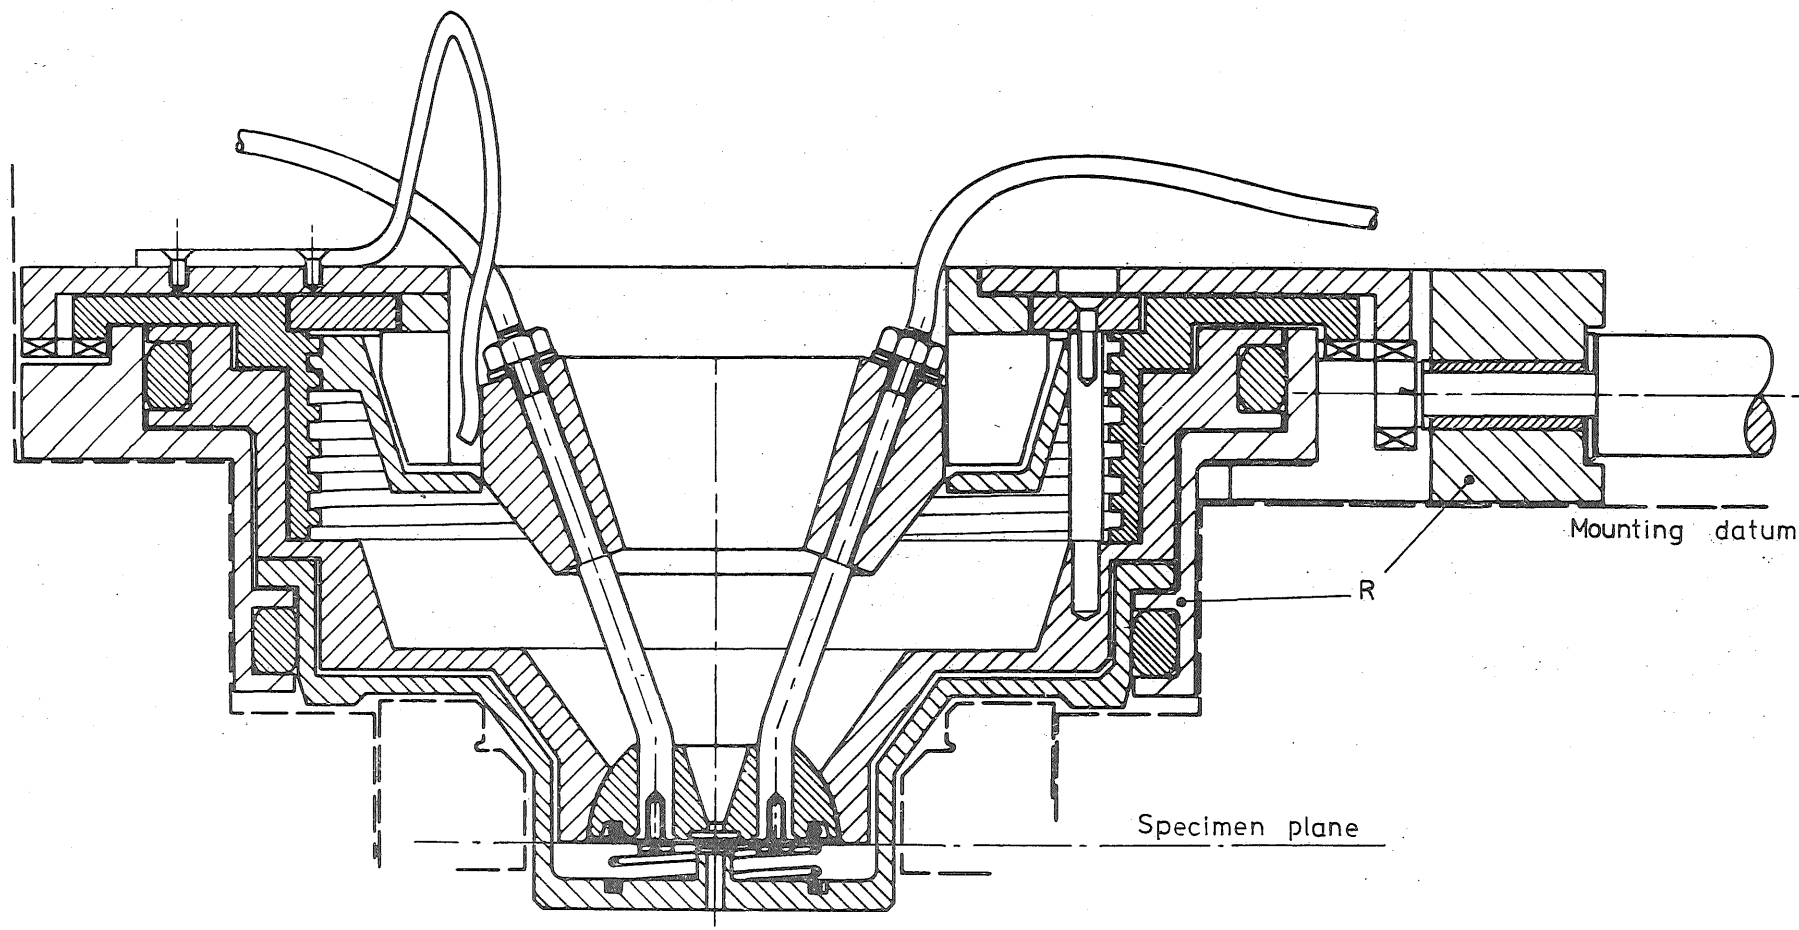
Initial concept of tilting gas reaction specimen chamber. The outer ring (R) which contains an 'O' ring seal and tilt drive shafts is designed to be permanently mounted in the electron microscope, the remainder of the stage being removable through an airlock. (Not constructed).
